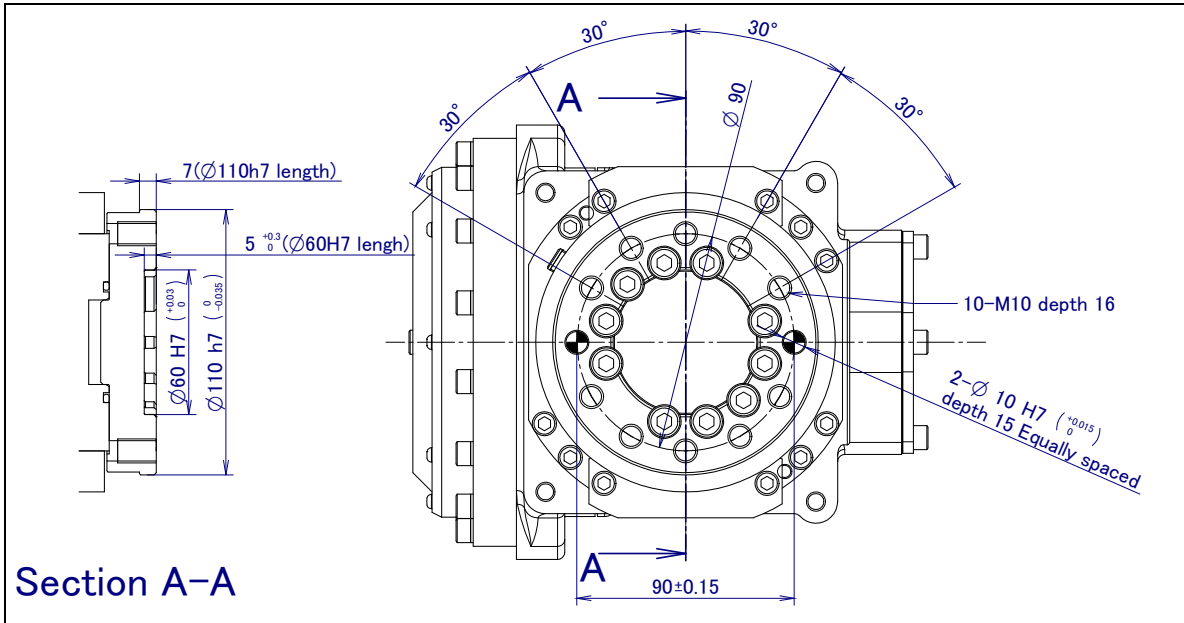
(b) FANUC flange (M-710iC/50, /70, /50H, /50S)
